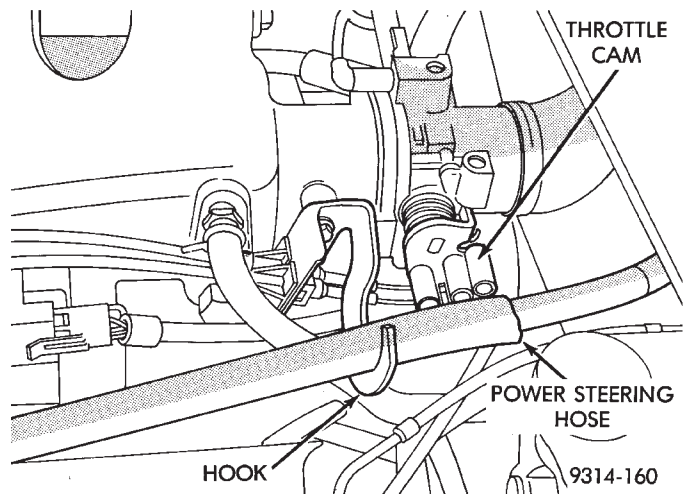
Power Steering Hose and Bracket—3.5L Engine
